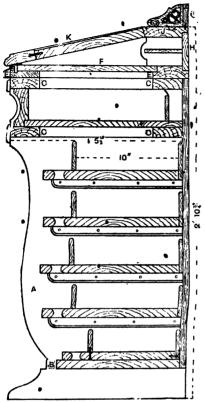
Vertical Section through Combined Cabinet and Writing Table.
